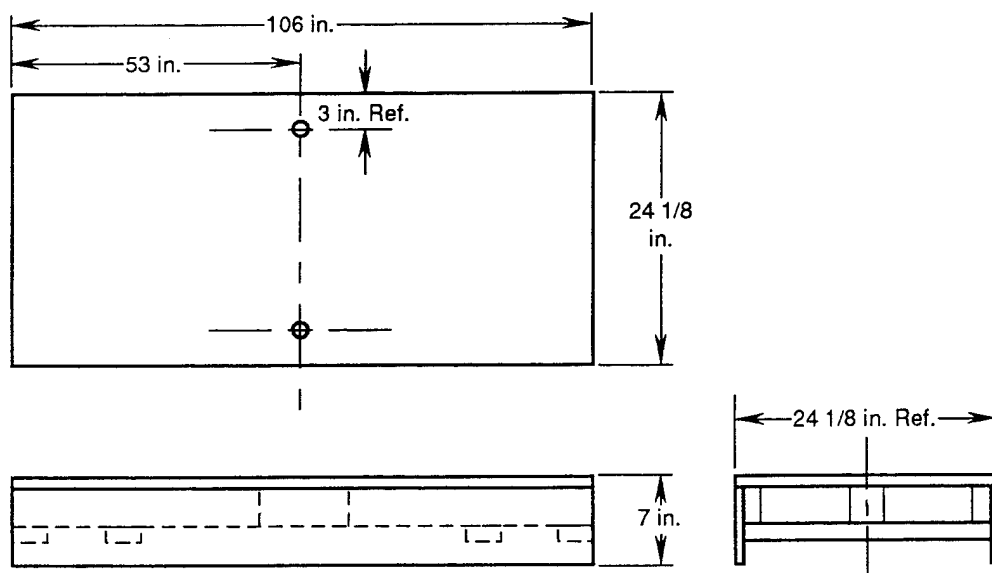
Platform For Supporting And Aligning Fixtured C-130 Propeller Rear Barrel Halves Onto The Rotary Rack.
